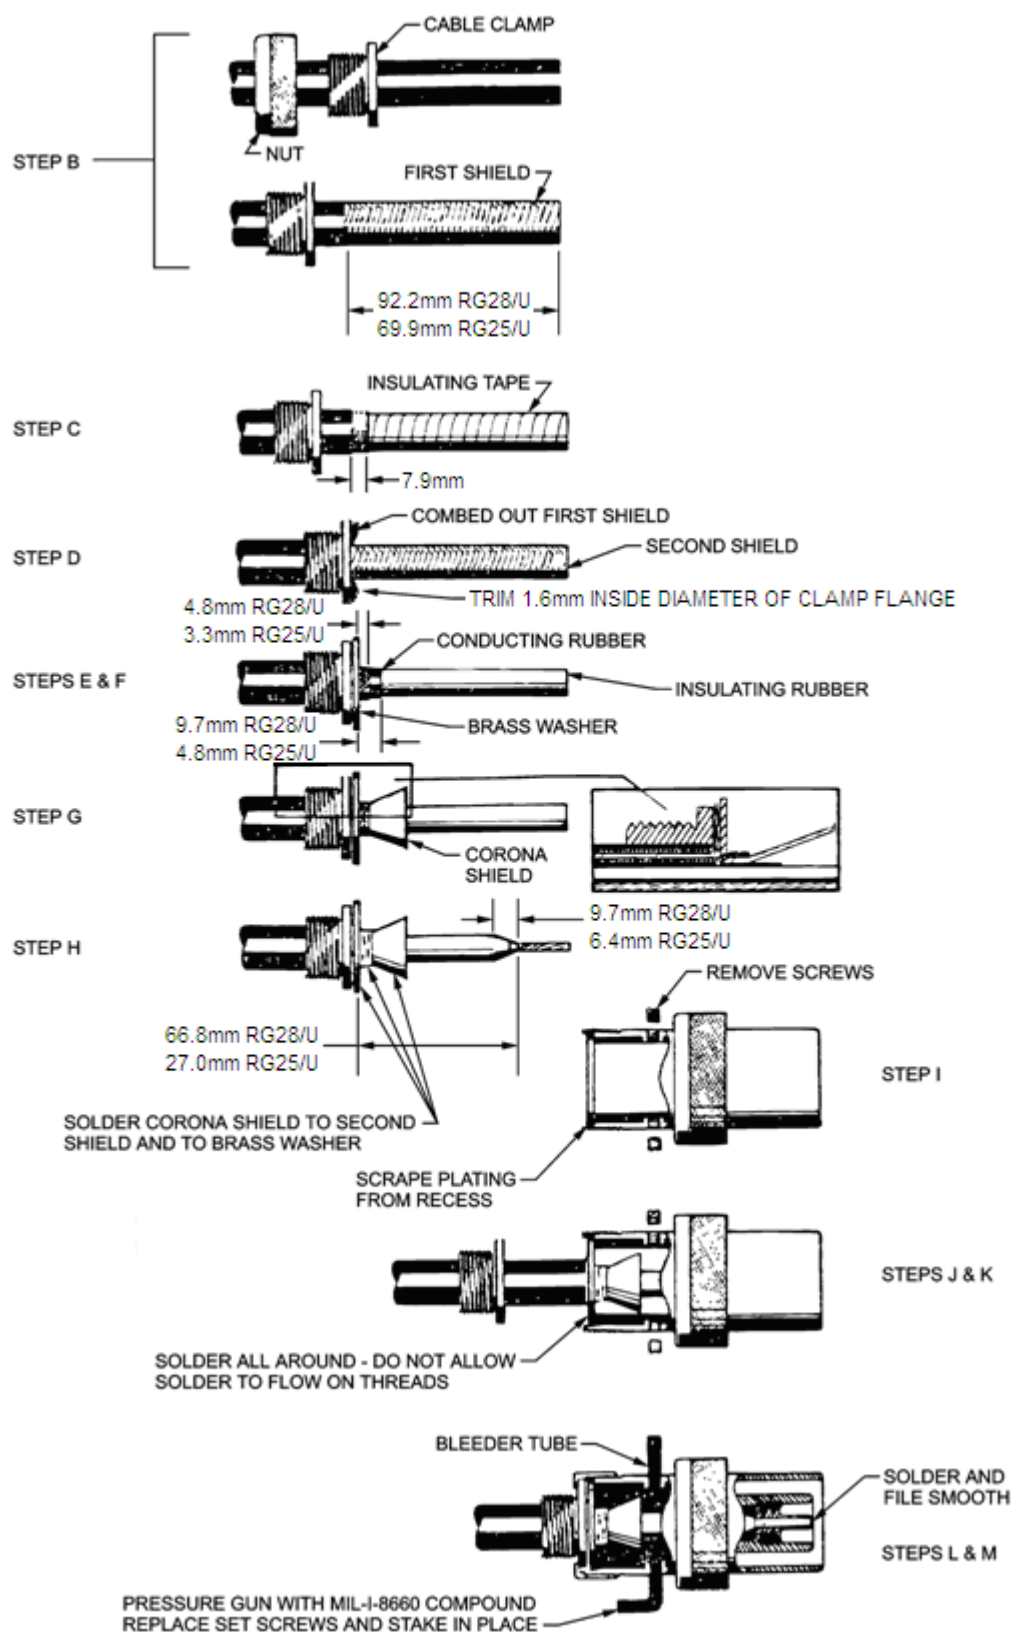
Assembly of Ceramic Insert Pulse Connector
